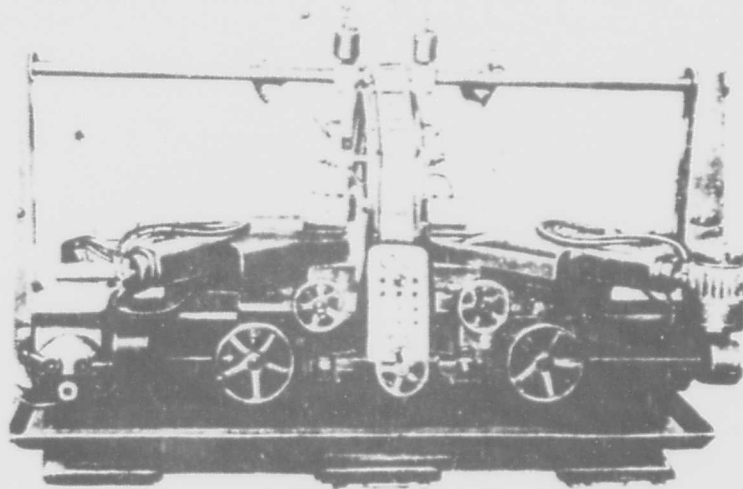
Simultaneous machining of two faces of wheel on hydraulic copying lathe.
